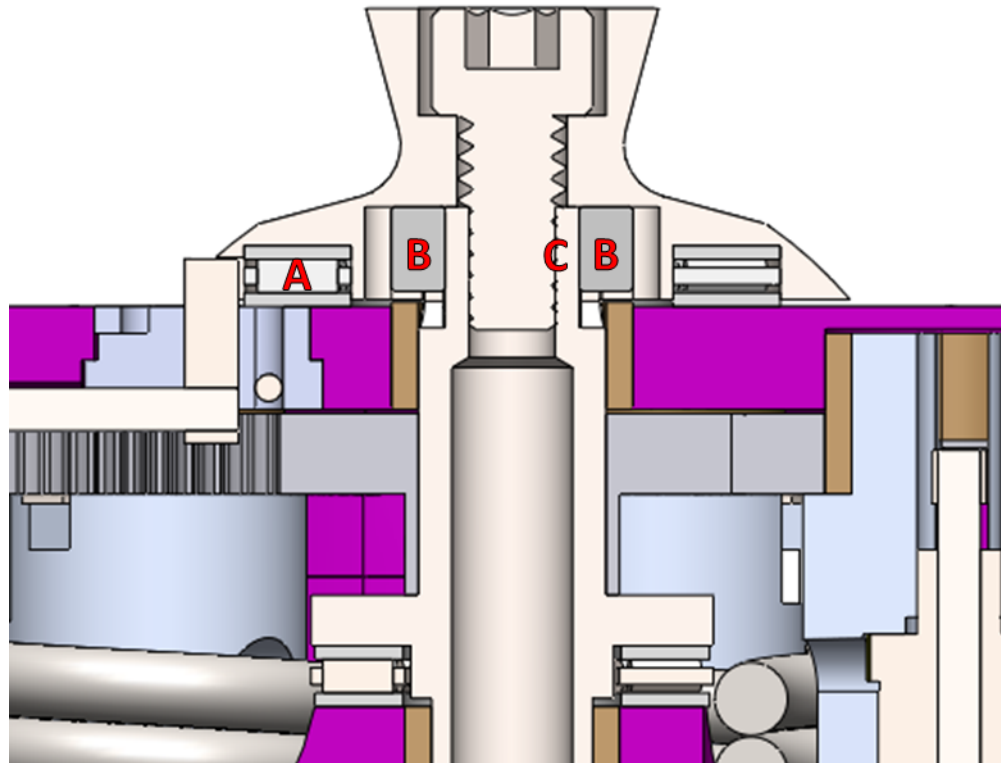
VSTA II design updates. Initial testing found the key features on the shaft and the bolted interface insufficient to withstand off-axis and bending loads while walking. Needle roller thrust bearing added between adapter and housing to support loads (A). Two additional keys added vertically along shaft to augment horizontal keys on top of shaft (B). Shaft extended farther up into the body of the adapter (C).
